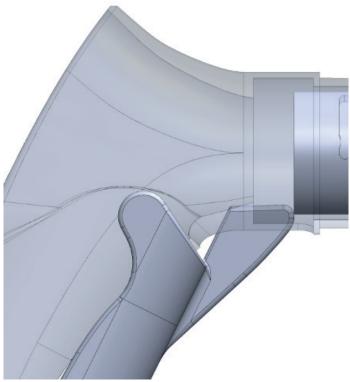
Cam sits flush to entry to main body when squeeze handle is compressed
